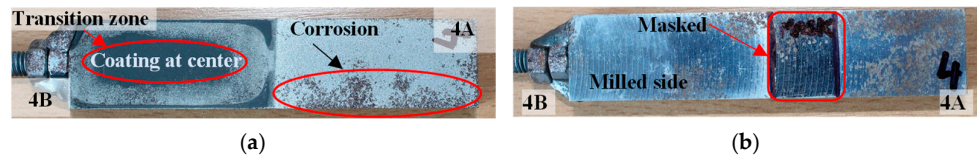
Sample 4 with coating removal: (a) corrosion and (b) milled side, masked part in the middle, negligible attack area 4A.
